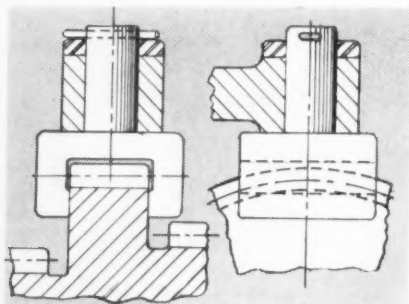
This sketch shows a design of straddle type shifting shoe which is particularly designed for moving a cluster of three gears.
